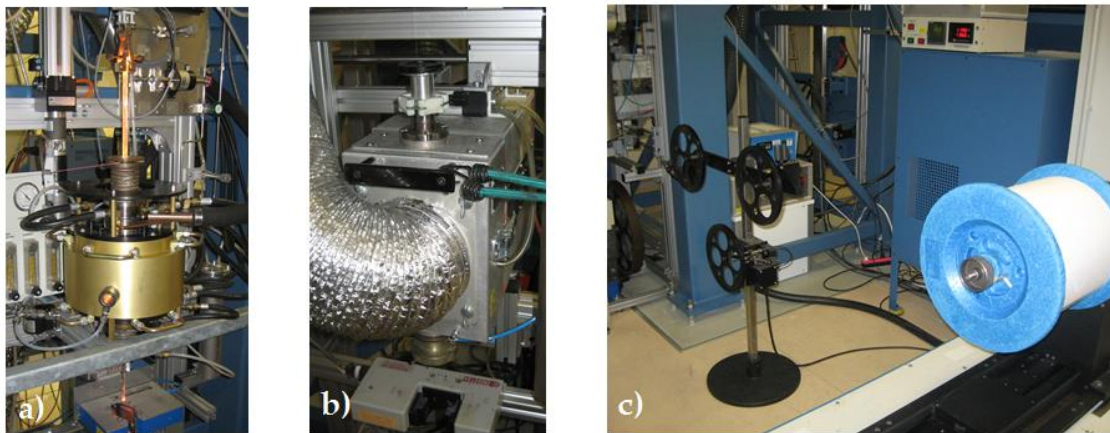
Fiber drawing components: (a) the drawing furnace with the preform, (b) the UV curing lamp and (c) capstan and drum winder.
